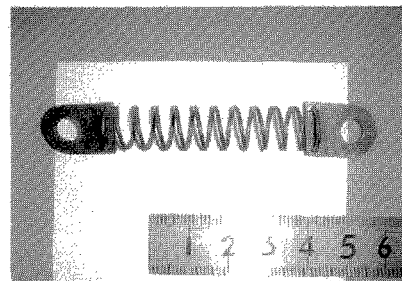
Appearance of test piece (after loading and unloading at 313K)
